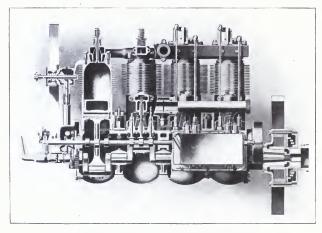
Sectional View of Franklin 1908 Engine. H. H. Franklin Manufacturing Company, Syracuse, N. Y.
